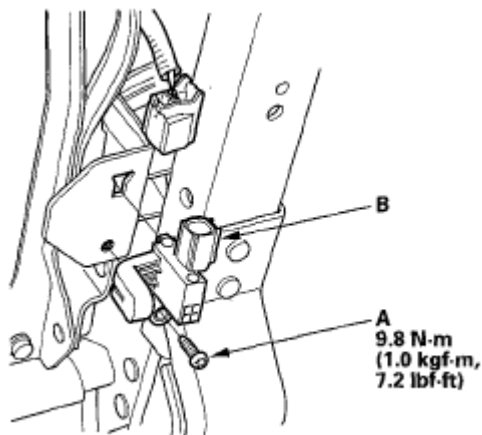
Identifying Driver's Seat Position Sensor Torx Bolt
